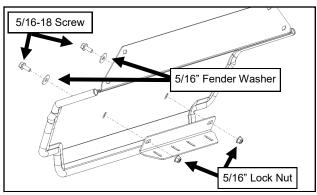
(Rear Panel to Toolbox Bracket)
